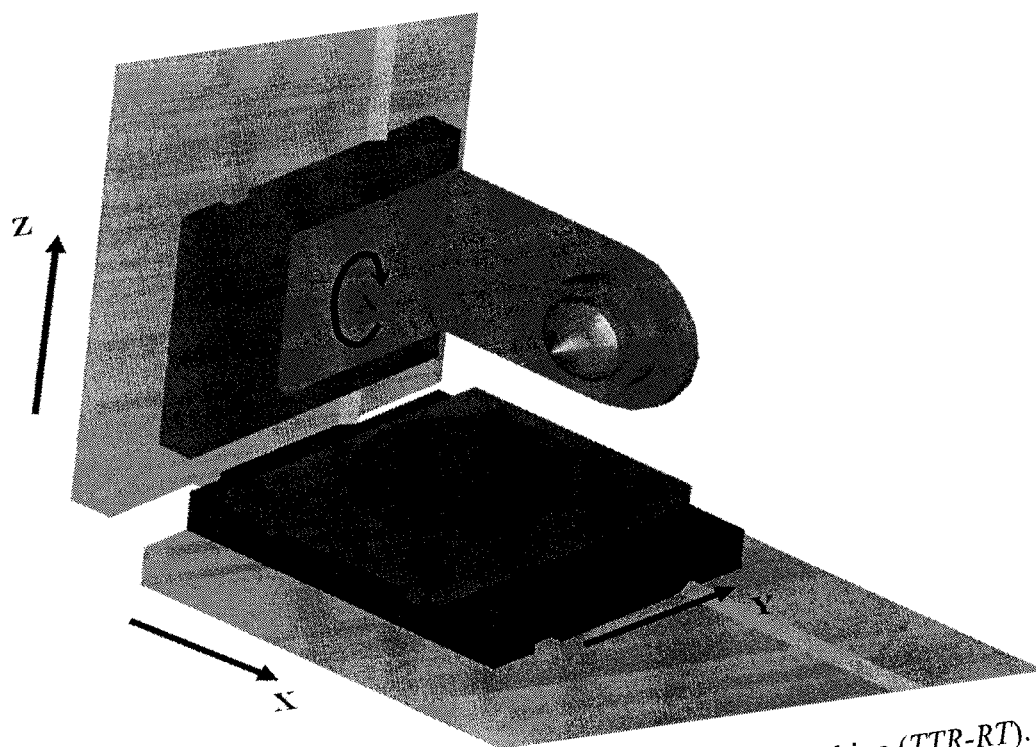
Schematic drawing for 5-axis milling machine (TTR-RT).
